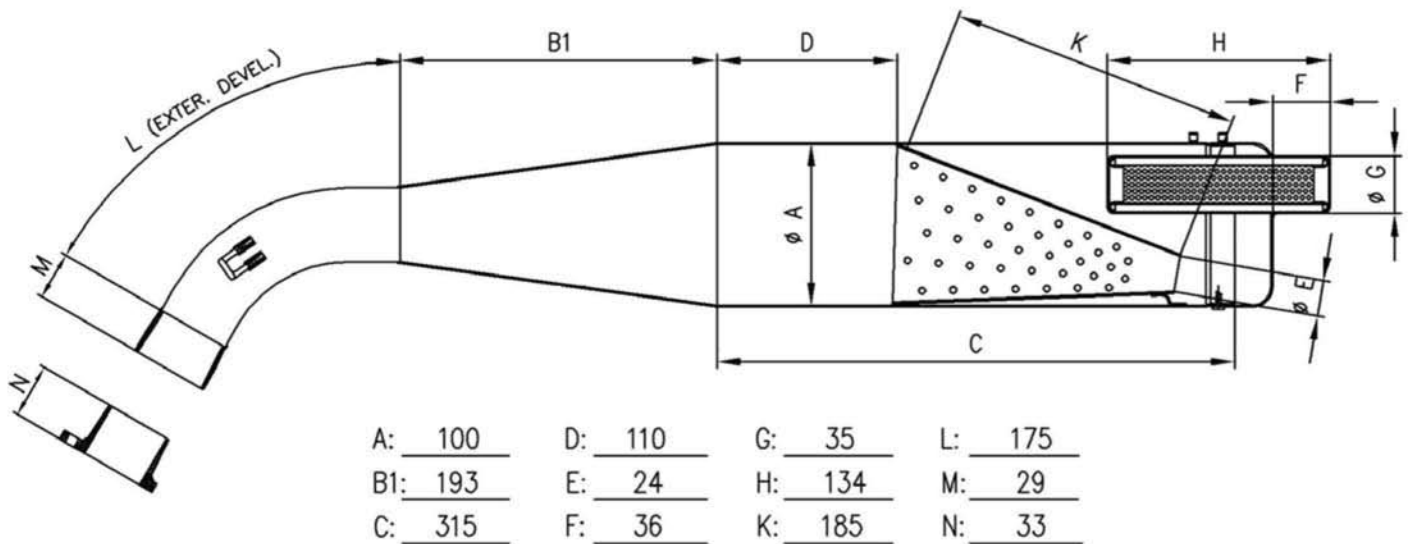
PHOTO IDENTIFICATION EXHAUST MUFFLER WITH FITTING
